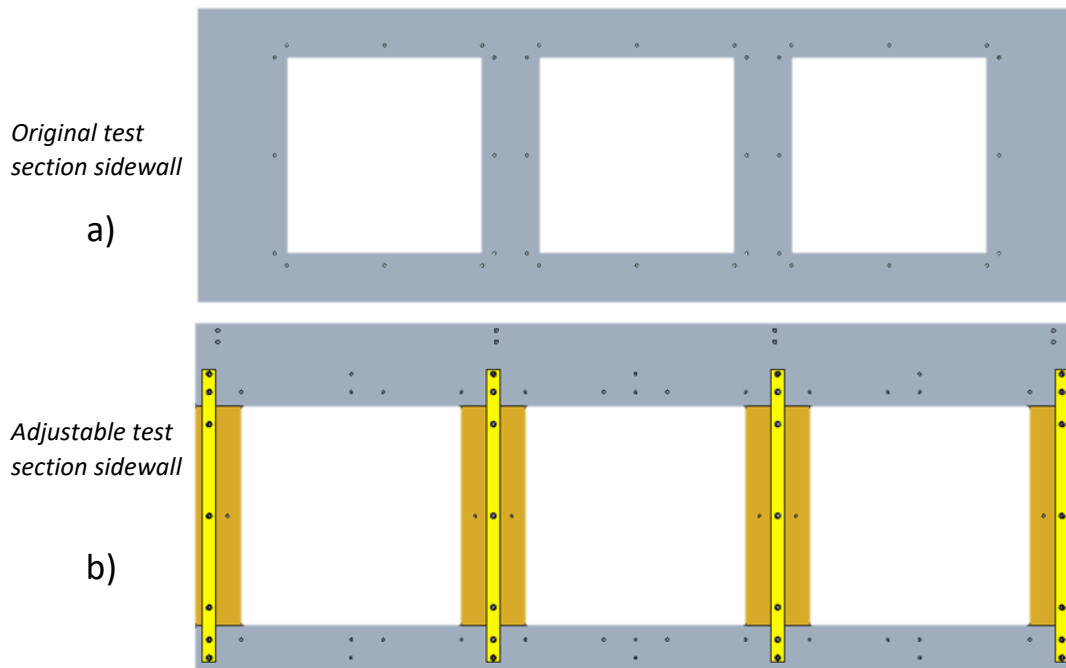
Comparison of original test section sidewall a) and new adjustable sidewall b). Note that the new adjustable sidewall is positioned 51 mm lower and allows the central supports to be repositioned as necessary.
